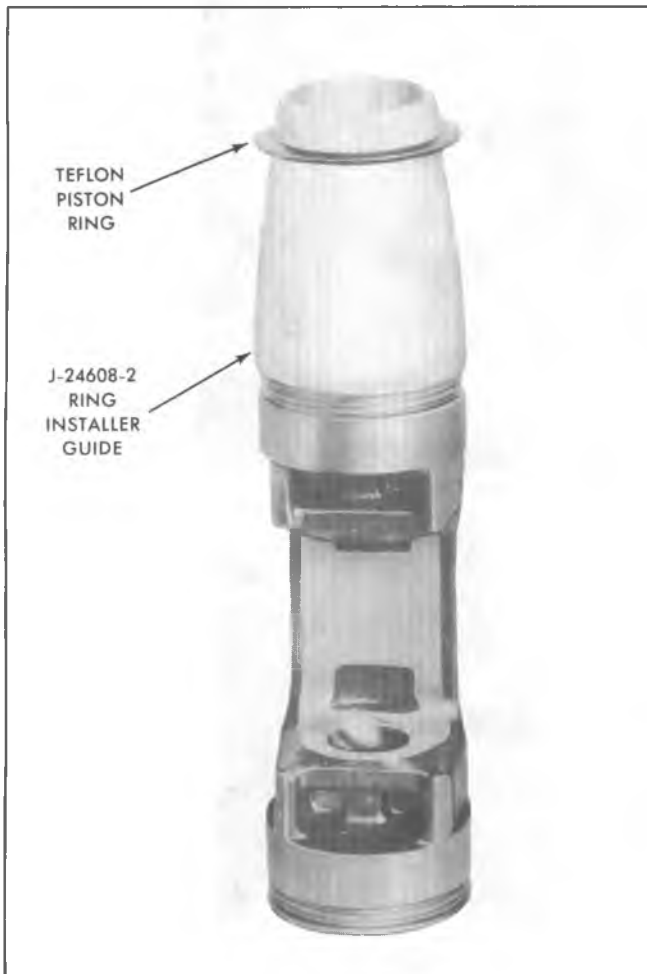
Teflon Piston Ring Positioned on Ring Installer Guide
